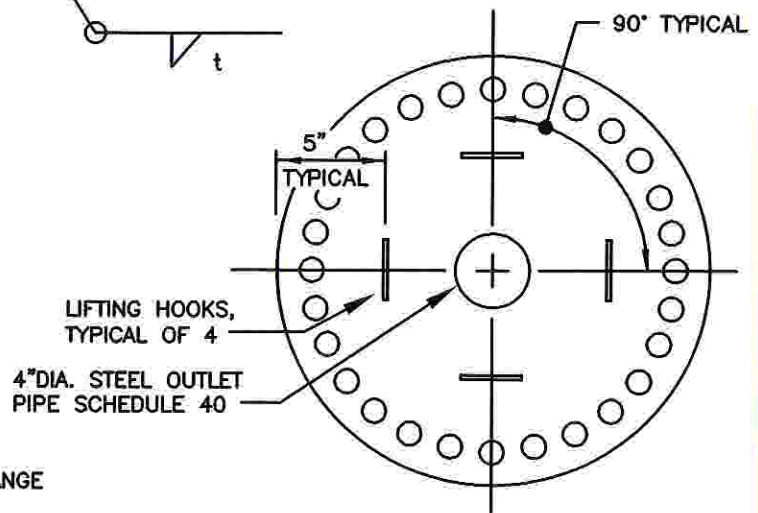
DETAIL OF ENTRY PORT BLIND FLANGE WITH 4" OUTLET
